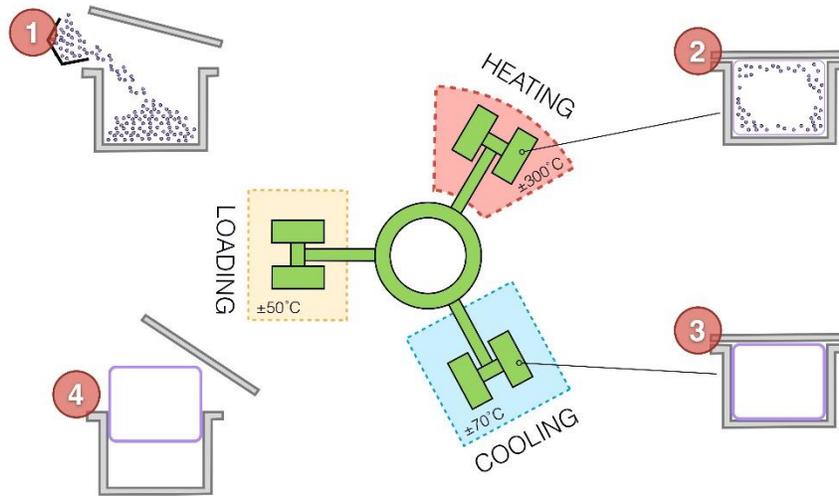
Process of rotational molding (Pentas Moulding, 2019).
